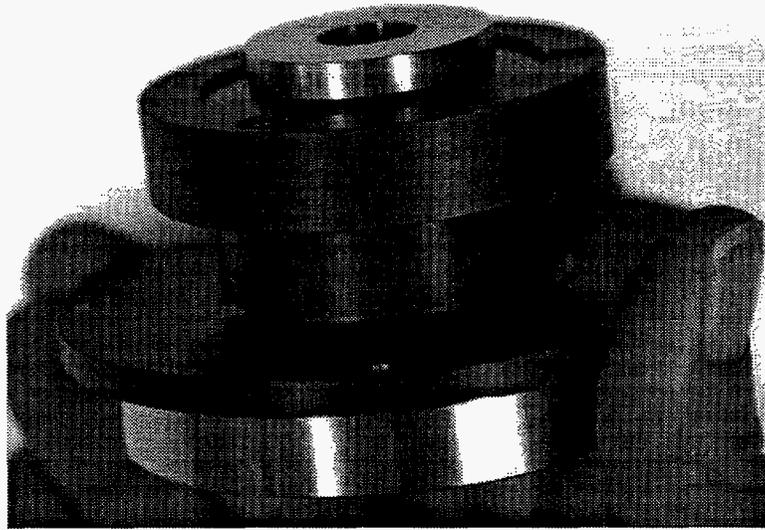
The center housing/reservoir cover of the device contains the Belleville spring washer that returns the piston to the upper starting position. The spring clamp preloads the washer and holds the piston in place as shown; the actuator further preloads the spring in the final assembly. Note the piston below the cover plate.
